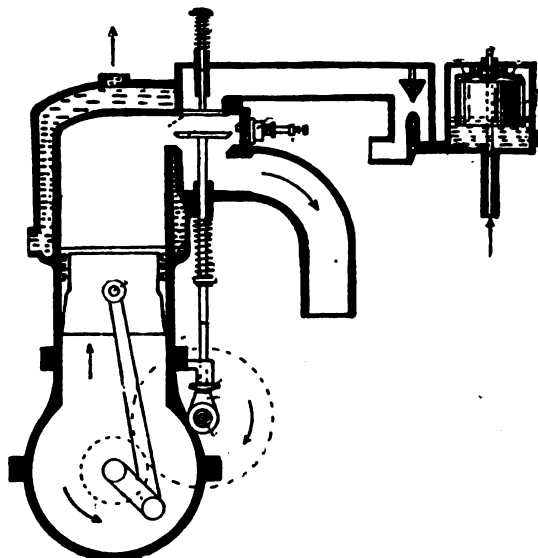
Showing the exhaust valve, so placed that the gases are diverted into a new direction while passing the valve; also that the discharge is greater on one than on the other side.
